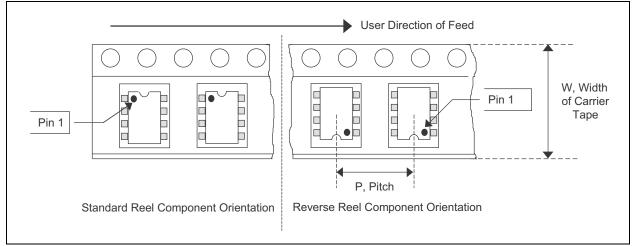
EMBOSSED CARRIER DIMENSIONS
